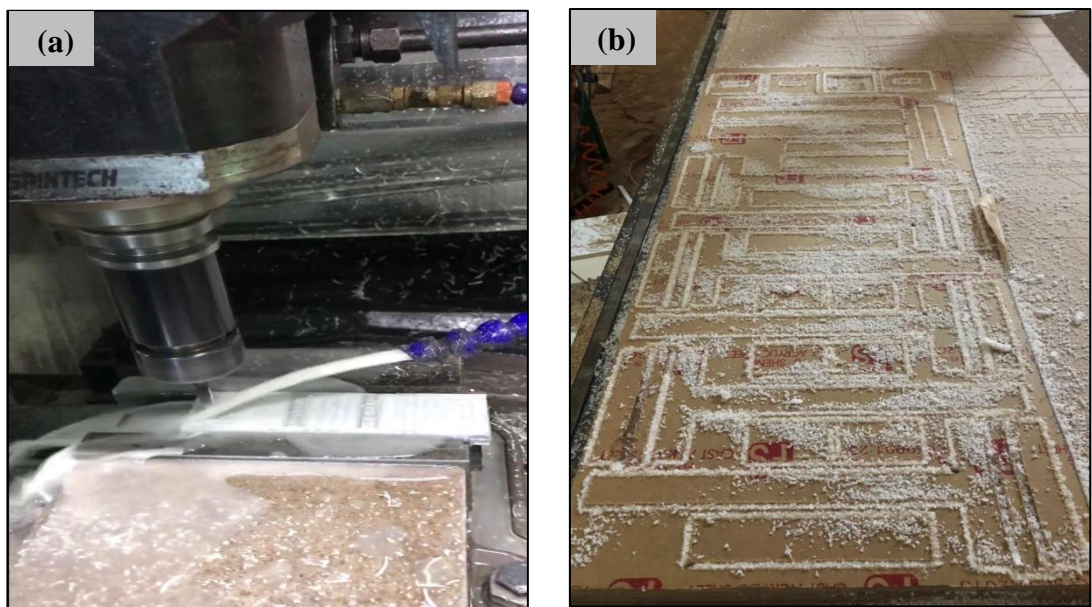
CNC machine used to fabricate (a) target shapes, (b) acrylic surfaces.
